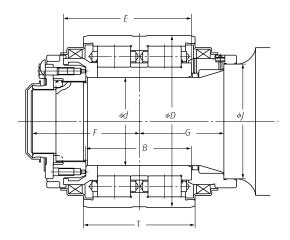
Sealed-Clean Rotating End Cap Cylindrical Roller Bearings
